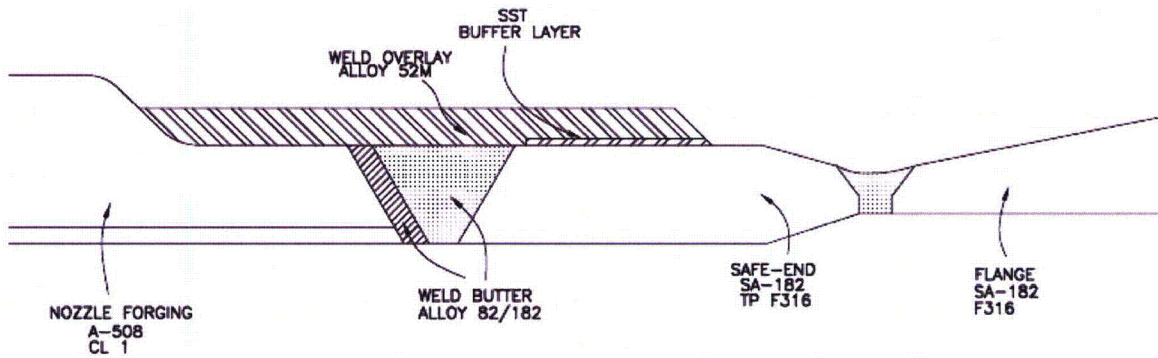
Illustration of Weld Overlay Design for Davis-Besse Pressurizer 3" Pressure Relief Nozzle
